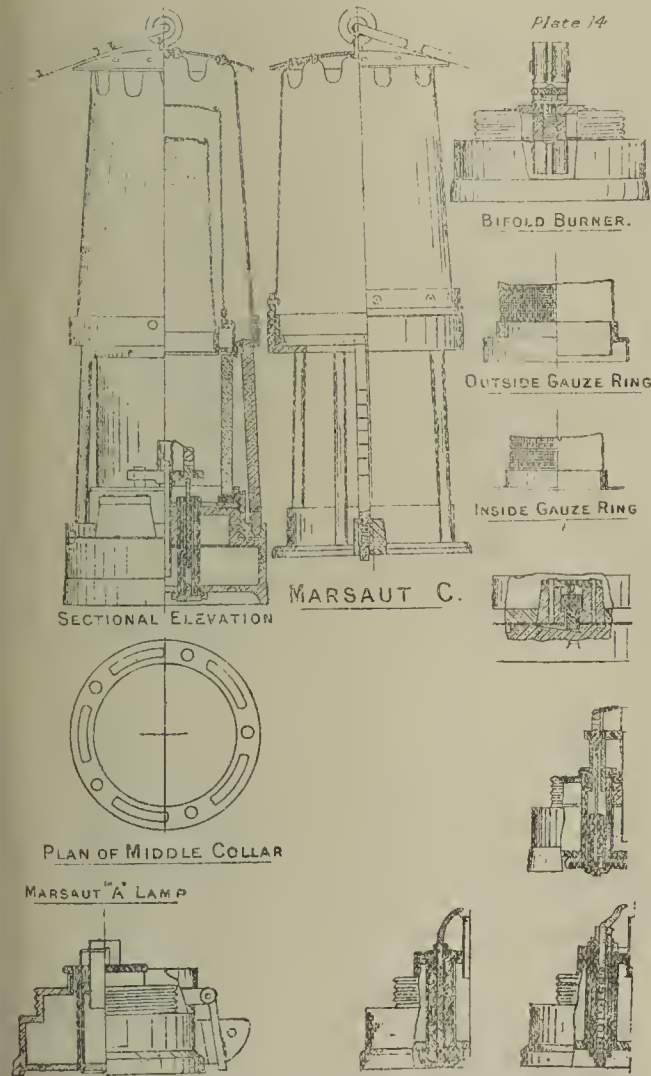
BIFOLD BURNER MARSAUT LAMP.
